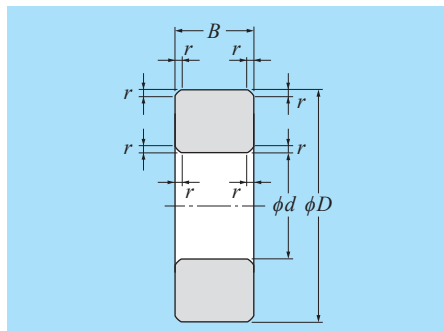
Radial bearings (excluding tapered roller bearings)
